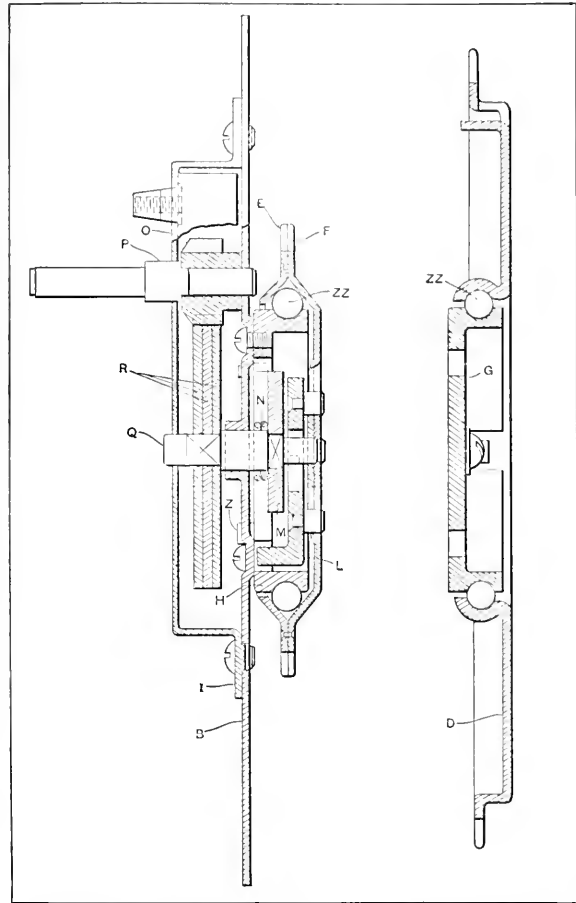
Sectional View through Upper Sprocket and Gear-box
